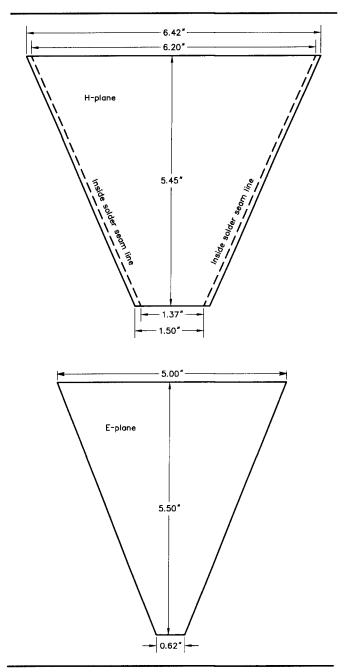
17-dBi 5760-MHz horn dimensions. The horn solders to WR-137 waveguide. The dotted line marks the inside solder seam.
